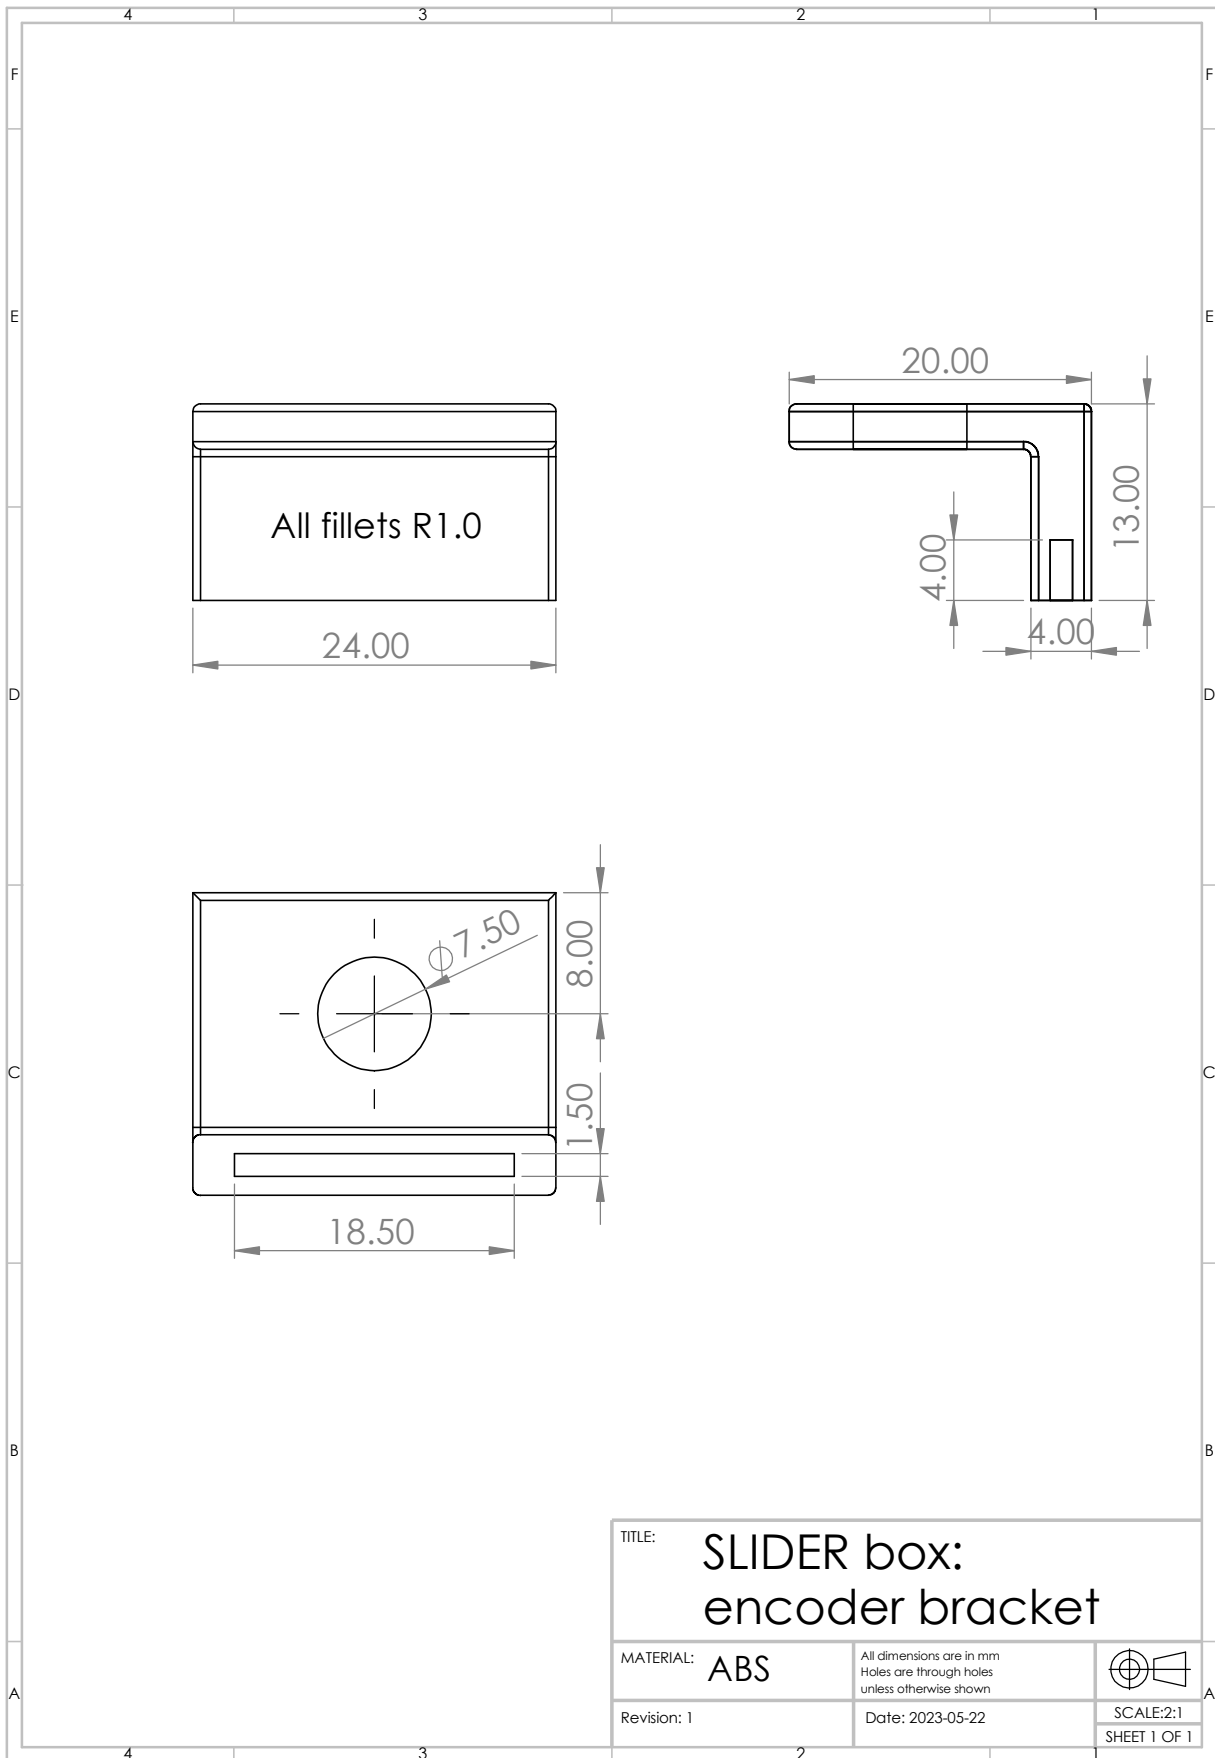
Technical drawing of the bracket used in SLIDER to attach the rotary encoder to the motorised slider.
